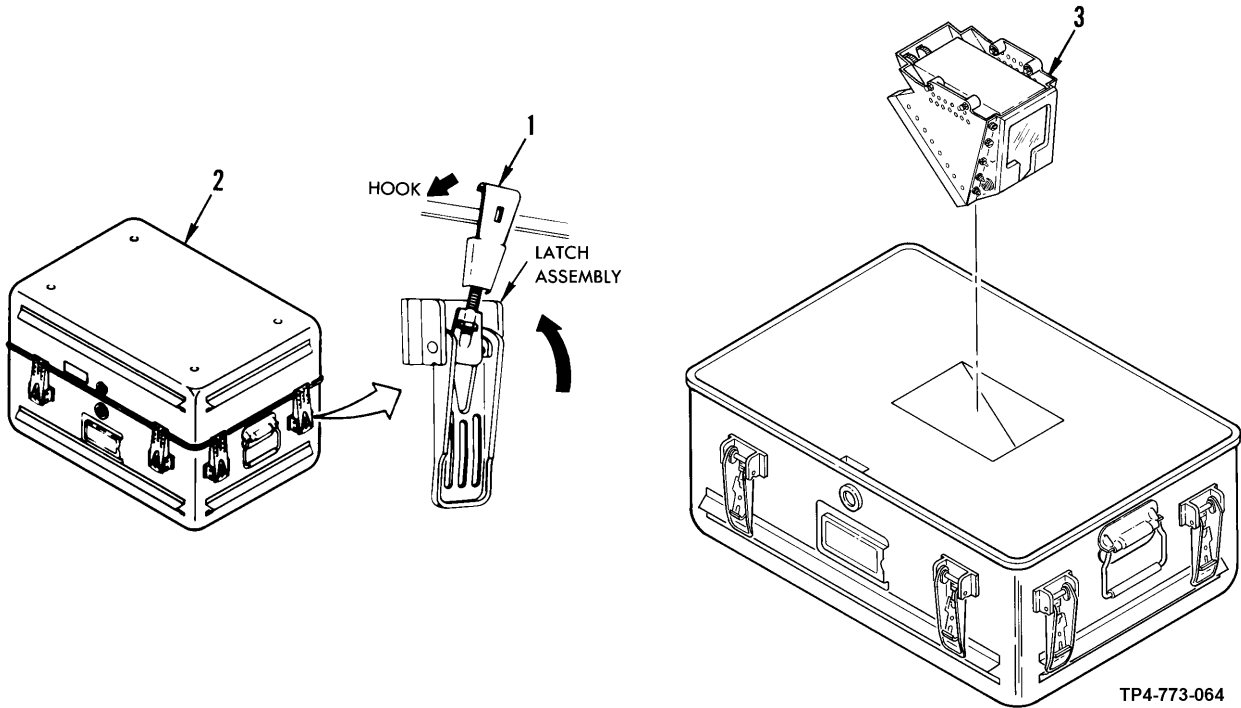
Control Panel Assembly Installation into Shipping and Storage Container
